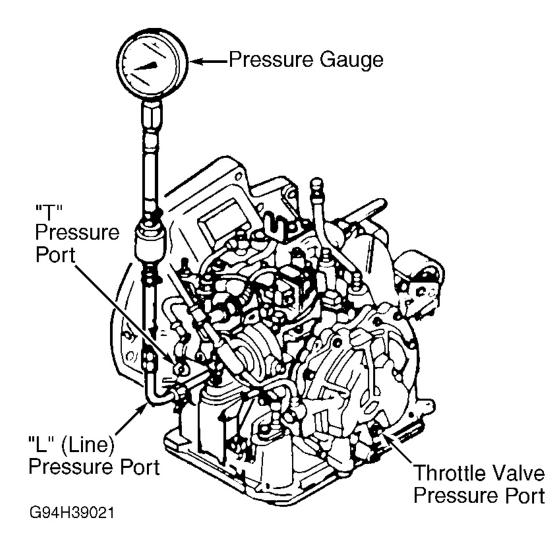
Connecting Pressure Gauge Courtesy of FORD MOTOR CO.
